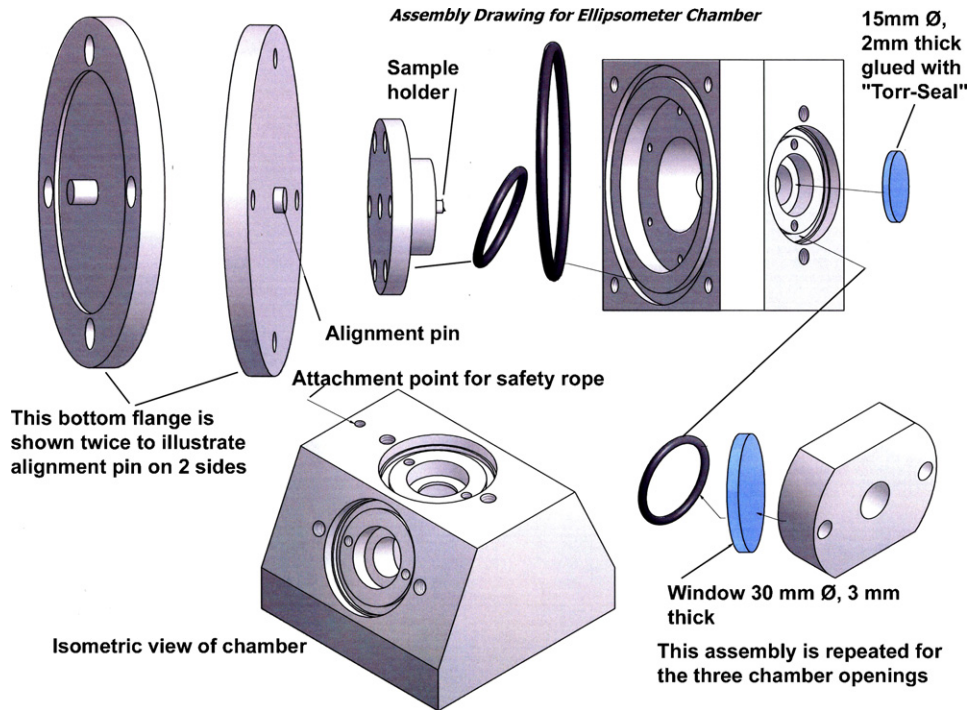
Assembly drawing of double-windowed ellipsometer chamber for plutonium analysis.
